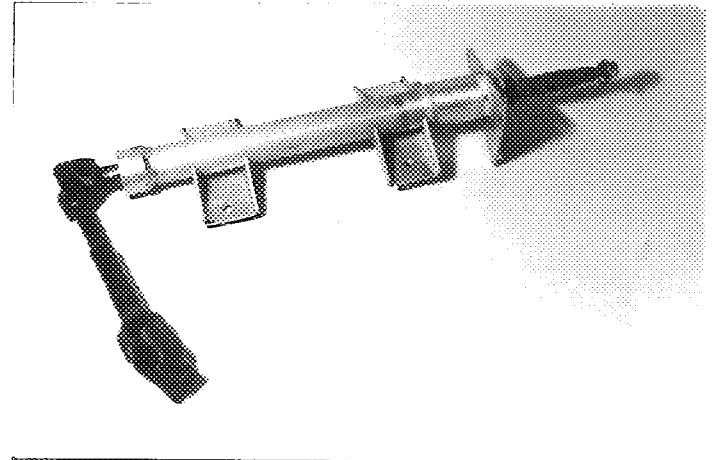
ALTERNATIVE STEERING RACK TYPE 1
